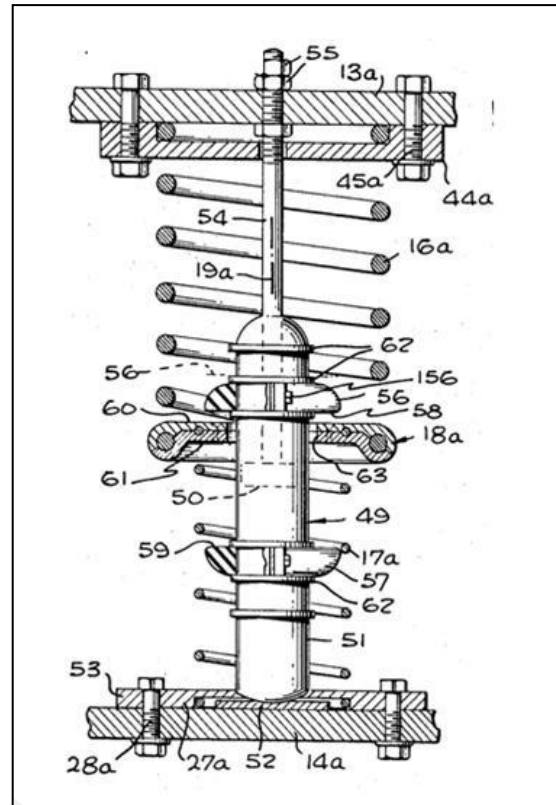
Series Arrangement of Spring with Stopper and Flanges [9]
